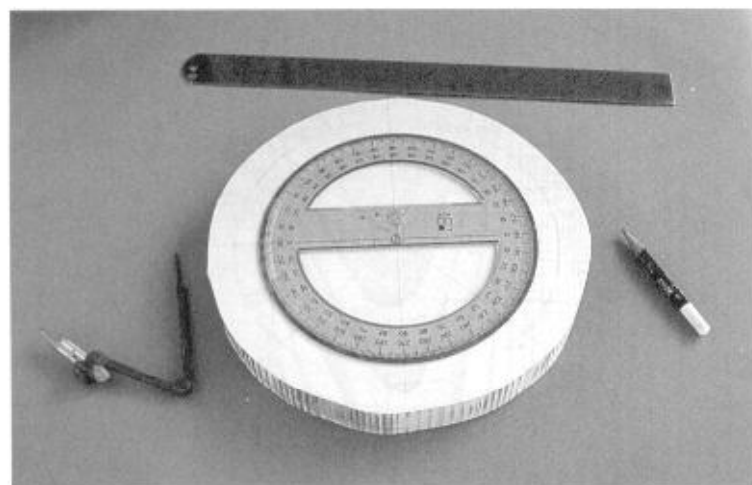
The board was marked out with a compass, protractor, steel rule and pencil.
